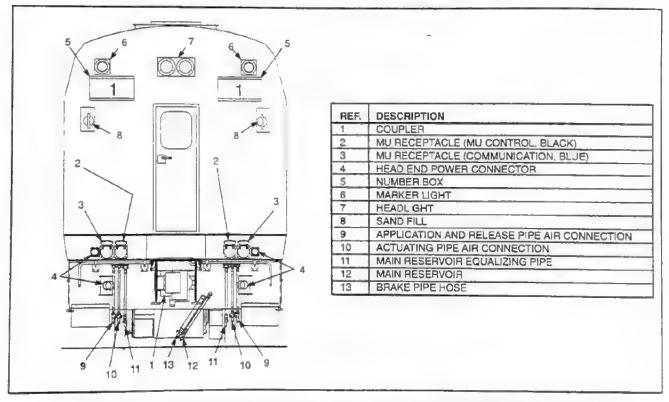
LOCOMOTIVE LONG-HOOD ASSEMBLY AND END CONNECTIONS. E-42746.
